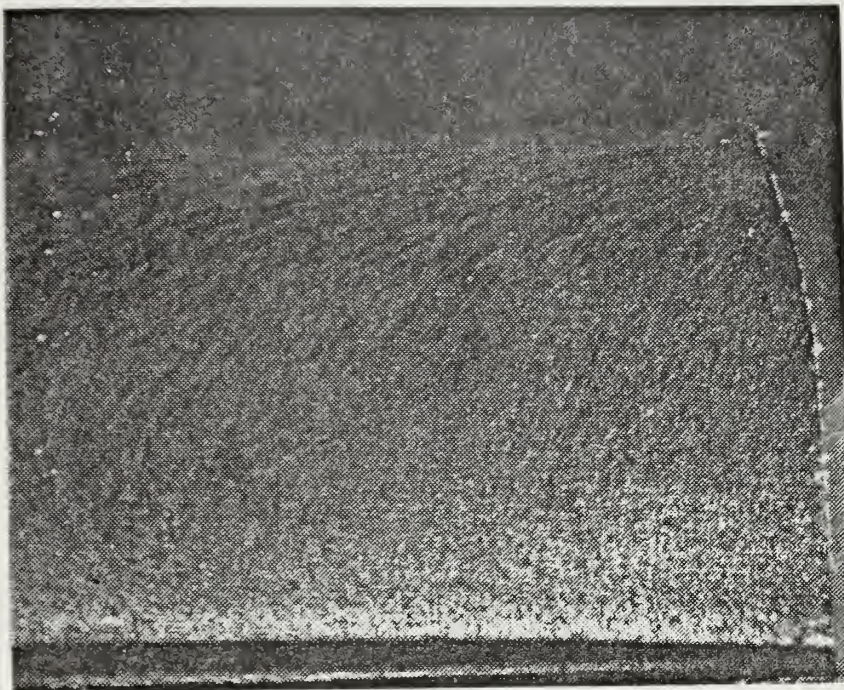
Macro-fractograph of specimen RQ-0-1, which was fractured after 16,500 cycles at 100 ksi, showing a crack initiation site (upper right corner) and chevron marks. Absence of fatigue zone is evident. X20.
